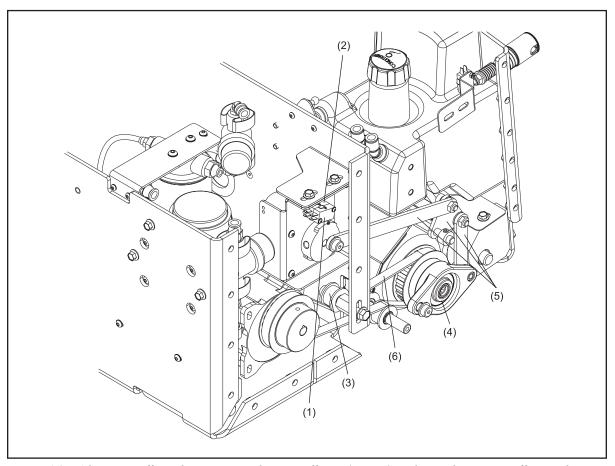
Adjusting Buffer Belt Tension, Replacing Buffer Up/Down Switches, Lubrication Buffer Brush Bearings and Lubricating Brush Lifting Assembly
